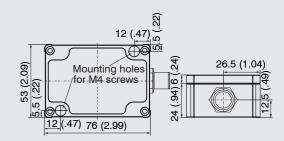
Dimensional drawing, dimensions in mm (inches), not to scale
